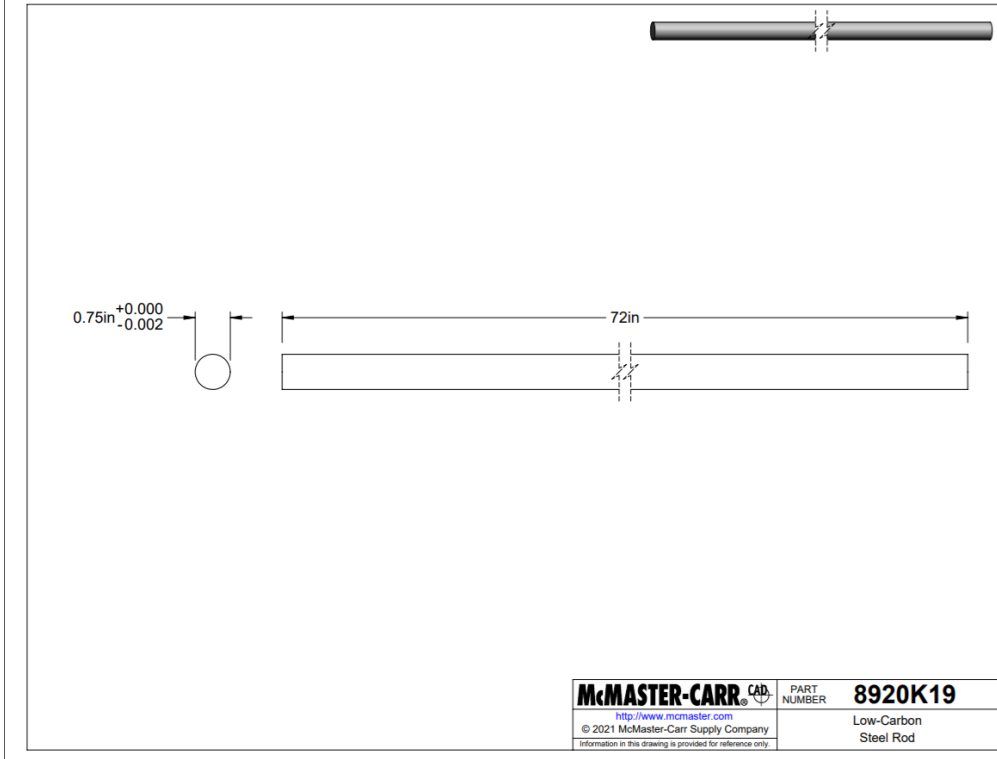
Drawing of Low-Carbon Steel Rod Used to Make Pins for Rotation System Provided by McMaster-Carr
